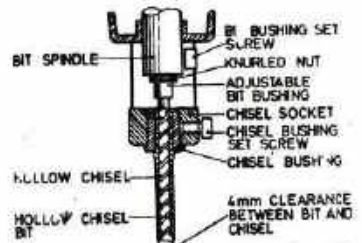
A CROSS SECTION OF A CHISEL AND BIT ASSEMBLY
